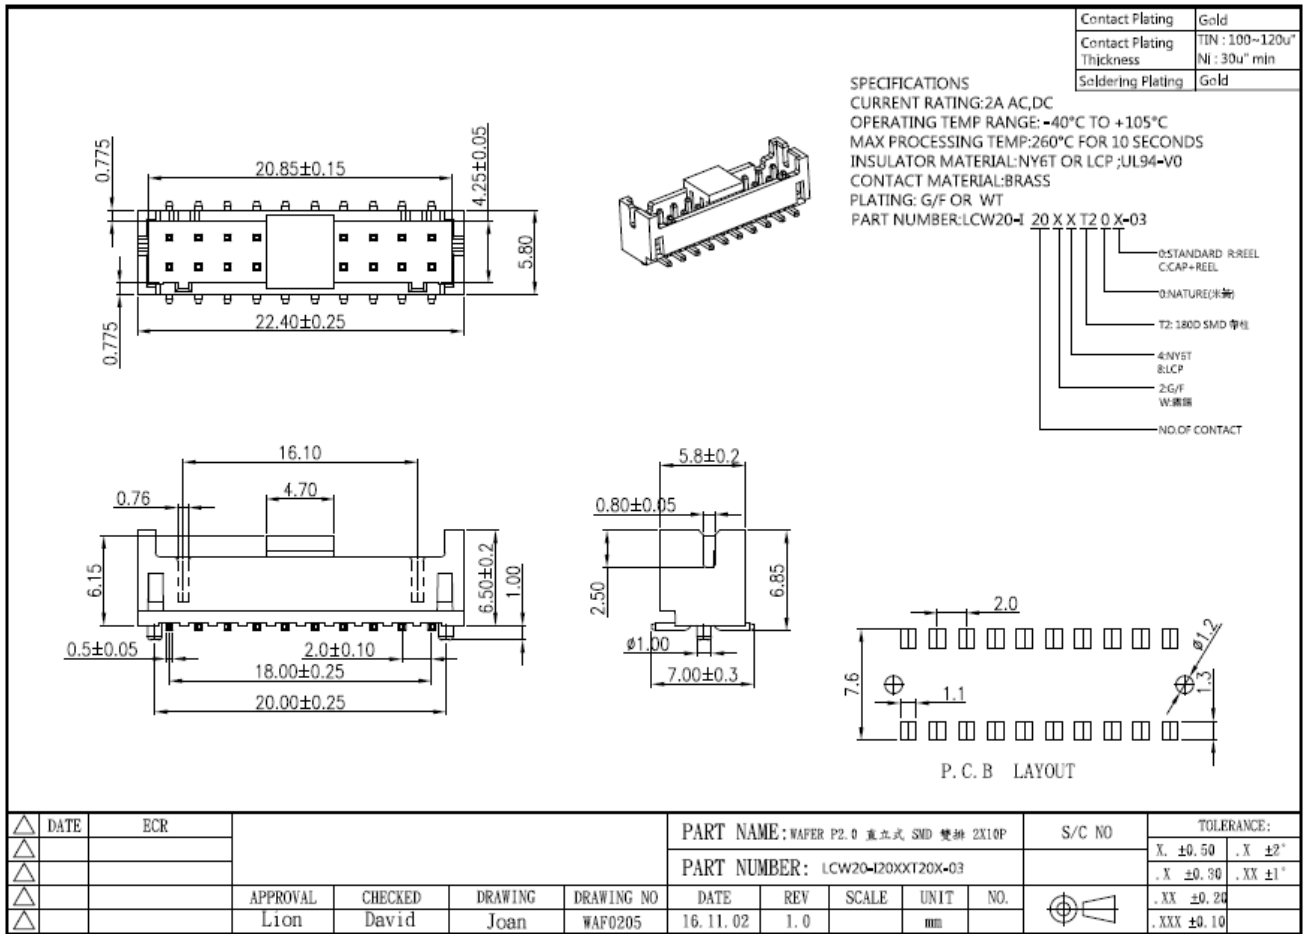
Wire to Board SMD 2*10P Connector Drawing
